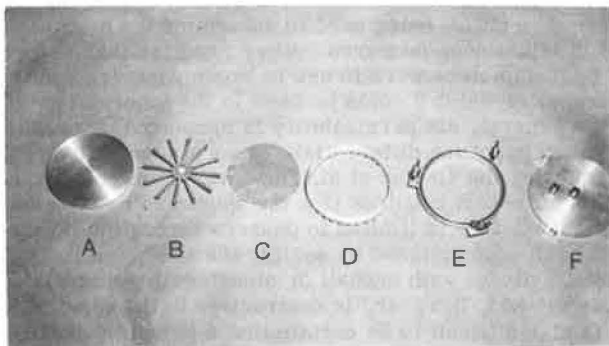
Component parts of the mold assembly: (A) base plate, (B) specimen supporter, (C) wire gauze, (D) lower collar, (E) upper collar with "o" ring, and (F) cover plate.
